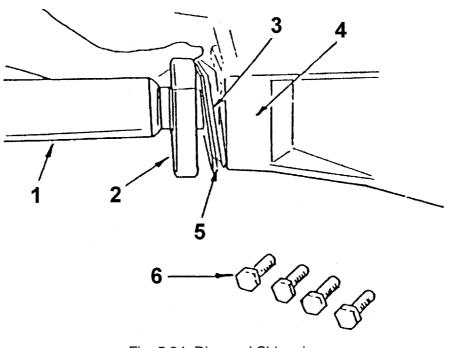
Diagonal Shimming1.Diagonal Strut4. Socket in Stress Reliever Lever2.Strut Cap5. Shims3.Ball End6. Cap Screws
